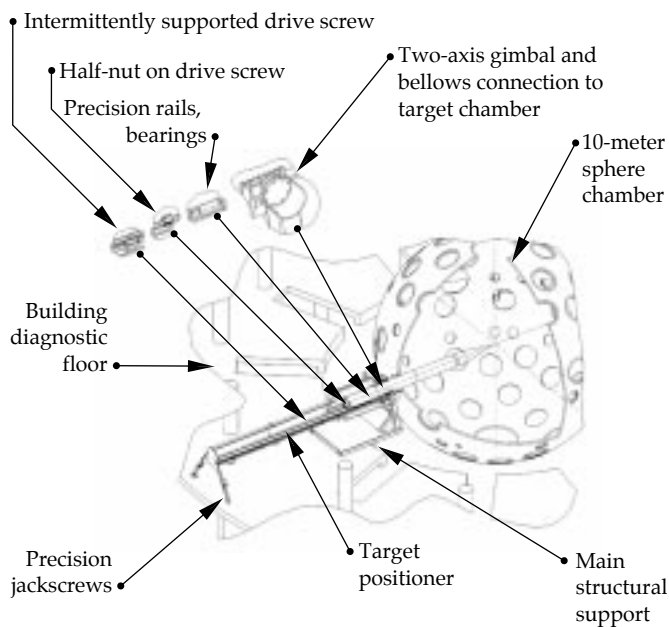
Target positioner design and components. (40-00-1097-2278pb01)
